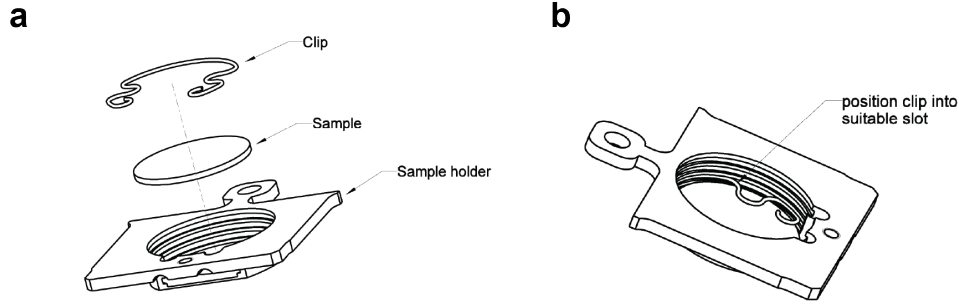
The schematic of the FOCUS sample holder. (a) The exploded assembly drawing showing the configuration of the mounting. (b) The back view of the completed assembly. Adapted from FOCUS PEEM manual.
